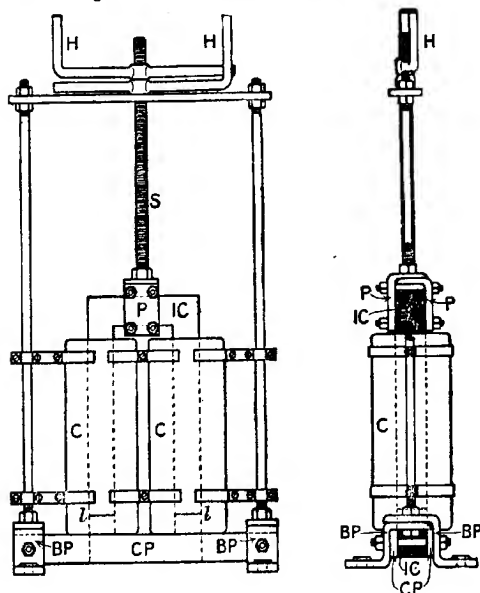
Adjustable Choking Coil. (*Foster Engineering Co.*)
